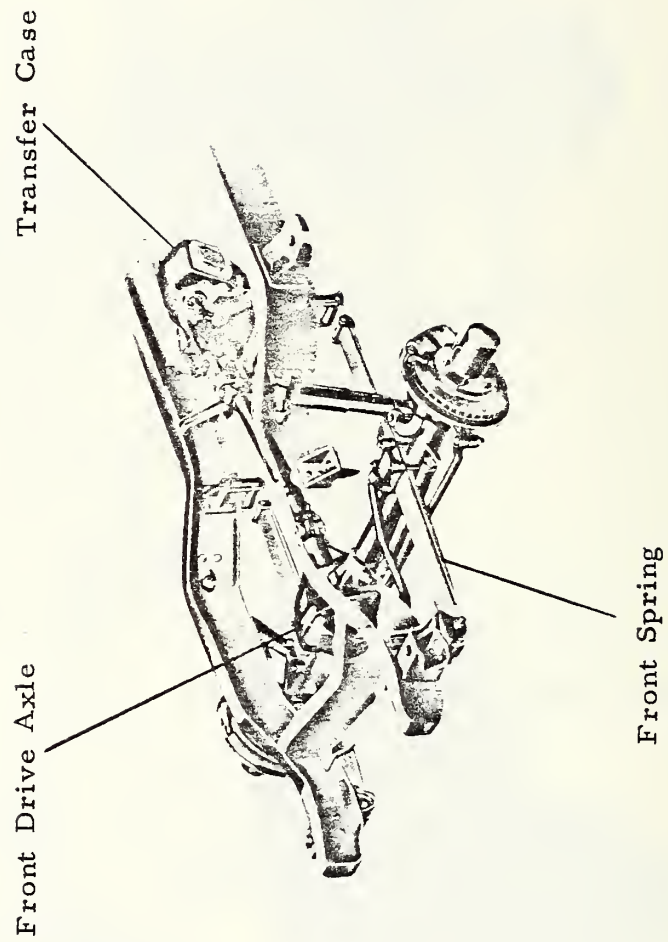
UTILITY FOUR-WHEEL DRIVE - FRONT SUSPENSION AND DRIVING AXLE
